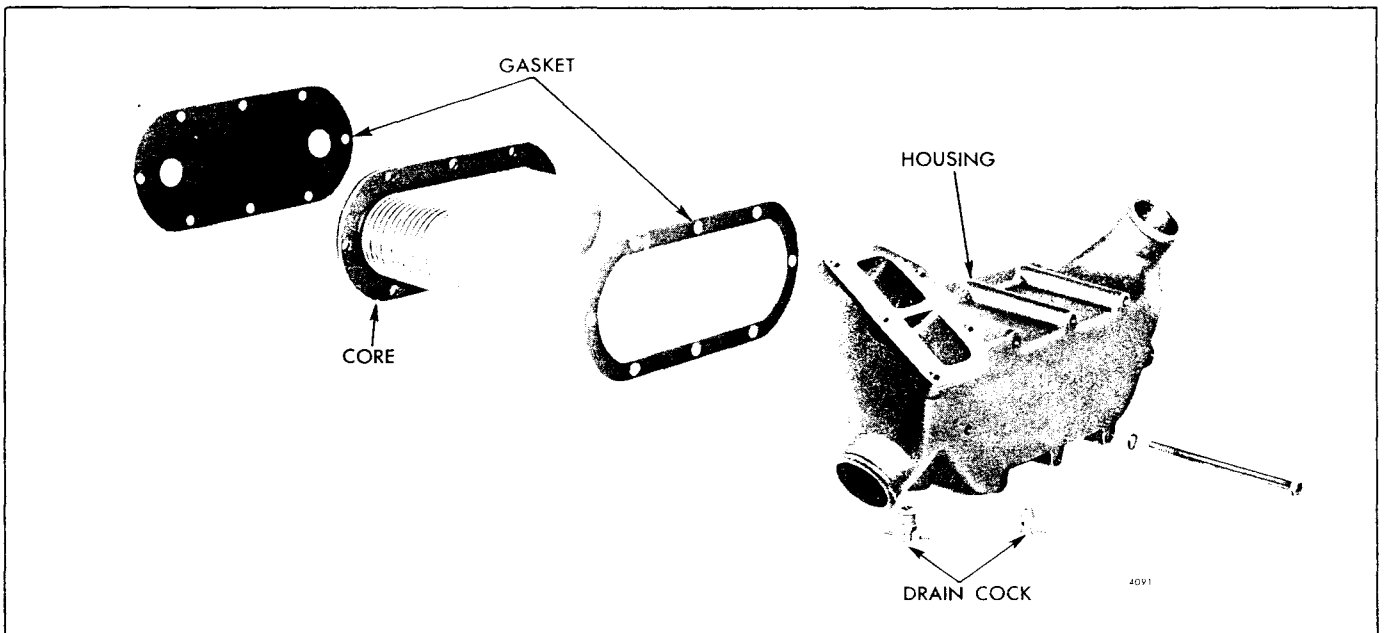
Oil Cooler Details and Relative Location of Parts (6V or 8V engine)
